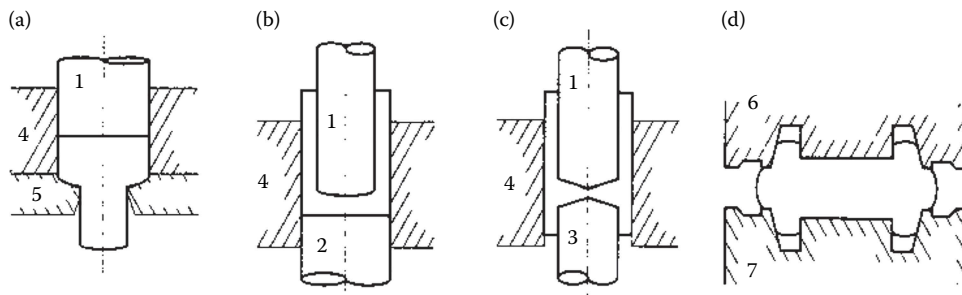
Basic forging operations, 1. Punch, 2. Backup punch, 3. Counter punch, 4. Container, 5. Die, 6. Upper die, 7. Lower die. (a) Forward extrusion of rod; (b) Backward extrusion of can; (c) Simultaneous extrusion of double cans; (d) Die forging
